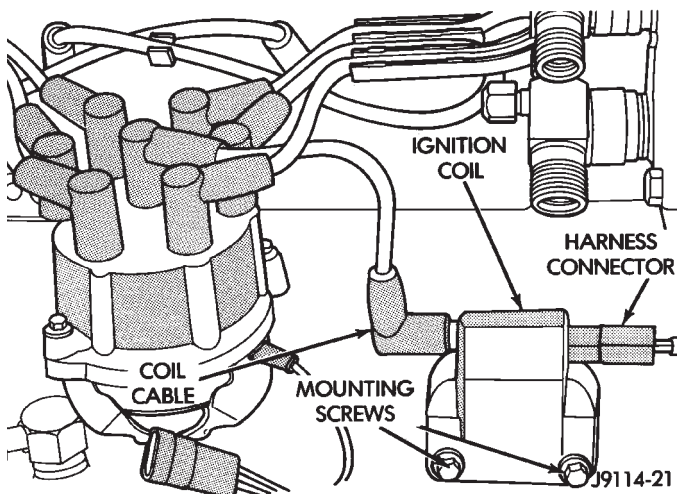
Coil Harness Connector—4.0L Engine—Typical
